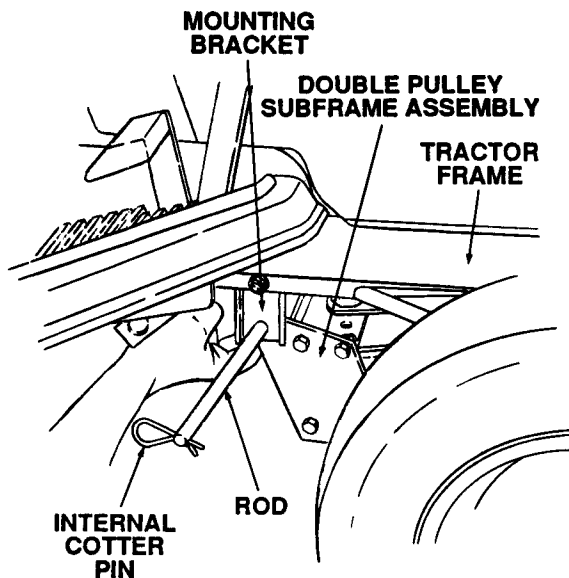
Attaching Double Pulley Subframe Assembly.
